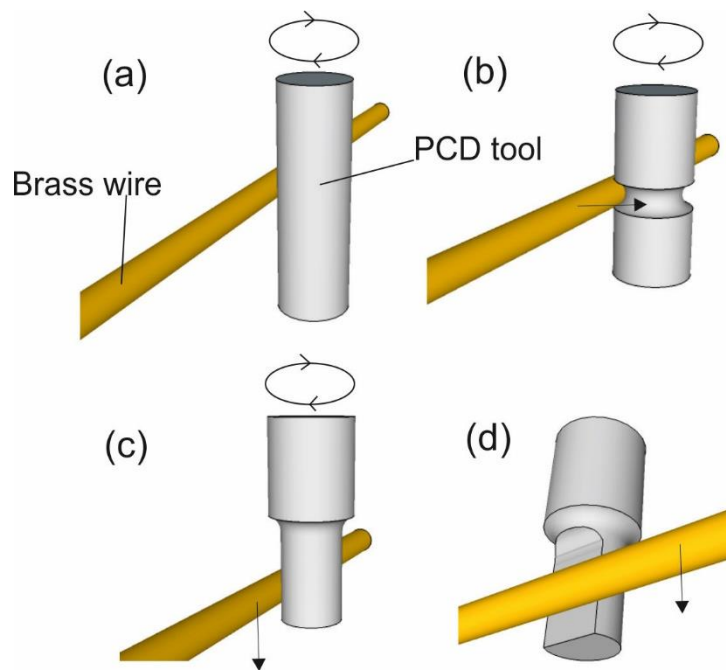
Schematic of tool fabrication. (a) Brass wire is aligned to tool (b) Wire is fed in horizontally to desired radius (c) Wire is fed vertically to create tool of desired length (d) Tool is clamped and wire is fed vertically to create D-shape cutter.
